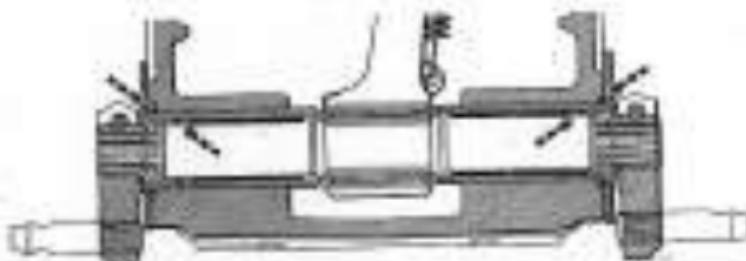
Replacing retainers or bearings of inner pull connecting rod shaft.
